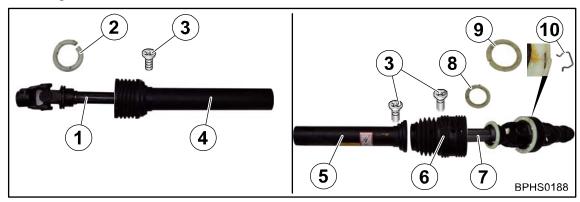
Inner PTO shaft half Outer PTO shaft half Section tube inside 2) 1) Raceway inside 4) Guard tube inside 3) Fastening screw 5) Guard tube outside 6) Protective sleeve 7) 8) Section tube outside Raceway outside 9) Slide ring 10) Retaining spring
